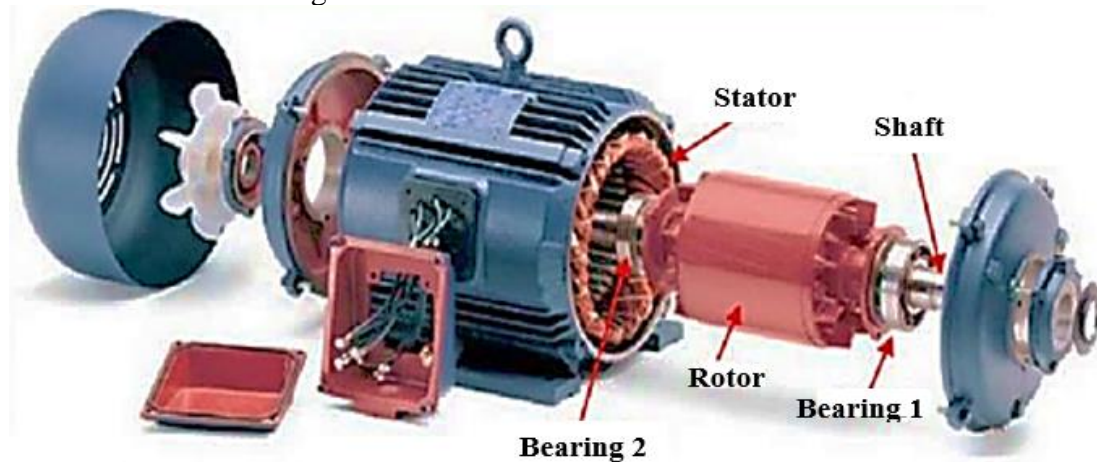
An Illustration of exploded view of an asynchronous electric motor (D’Urso et al., 2021).
